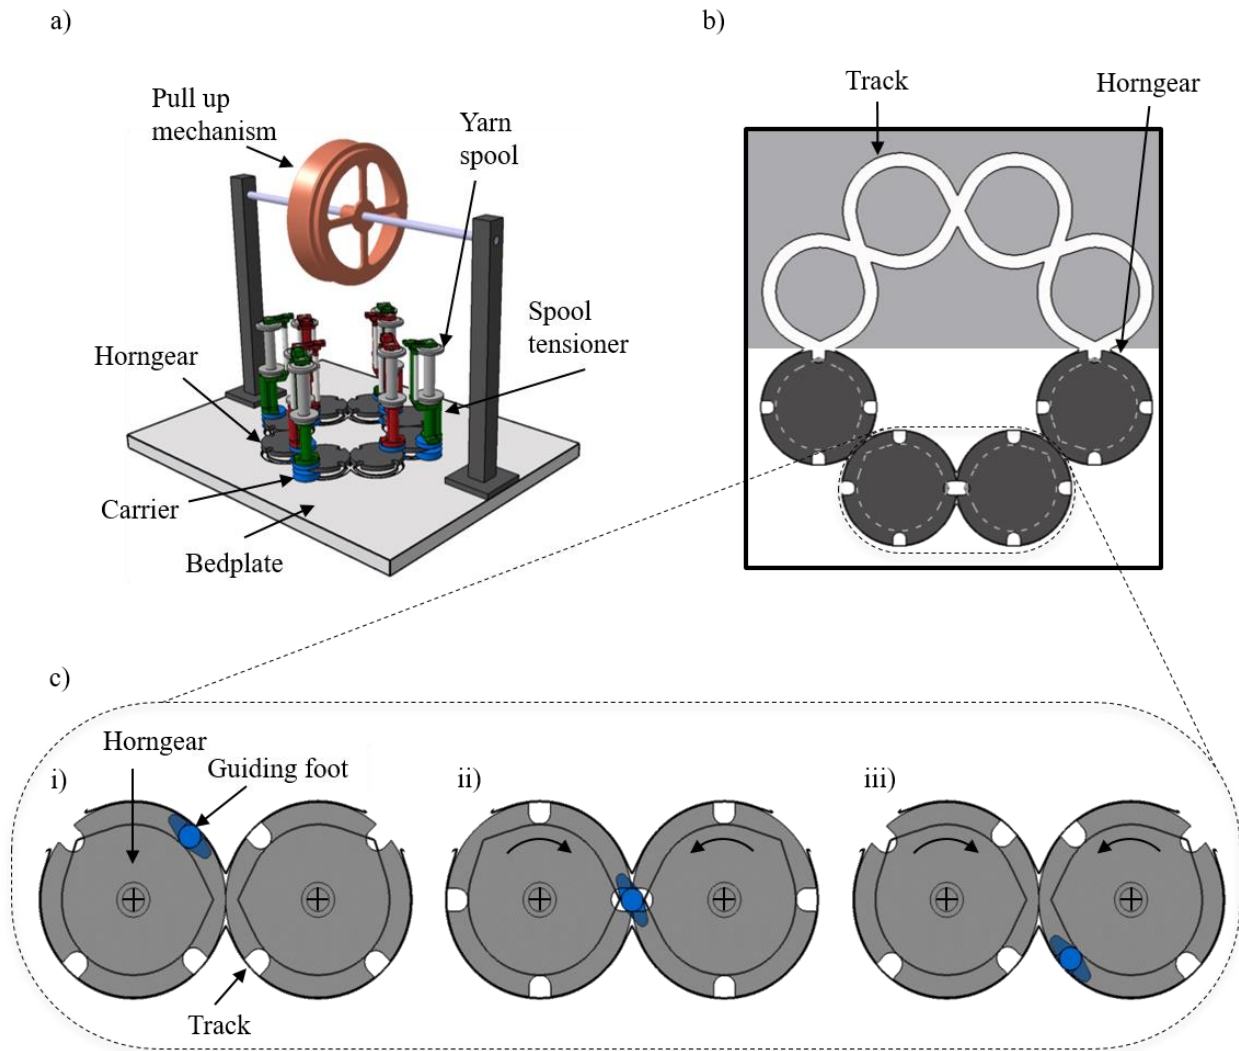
a) Isometric view of a maypole-braiding machine and its main components. b) Top view of the bedplate. Half of the horn gears are illustrated in order to visualize the track underneath them. c) Carrier transfer between two horn gears i) Initial position ii) intermediate position final position.
